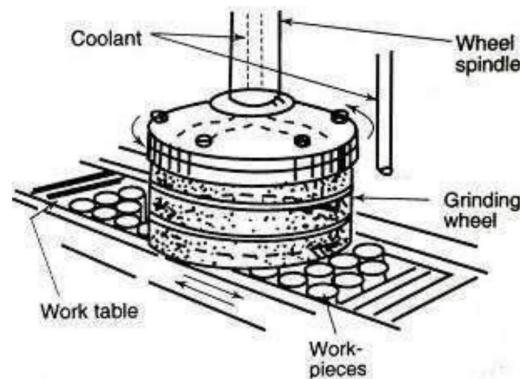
Vertical spindle and reciprocating surface grinding process
